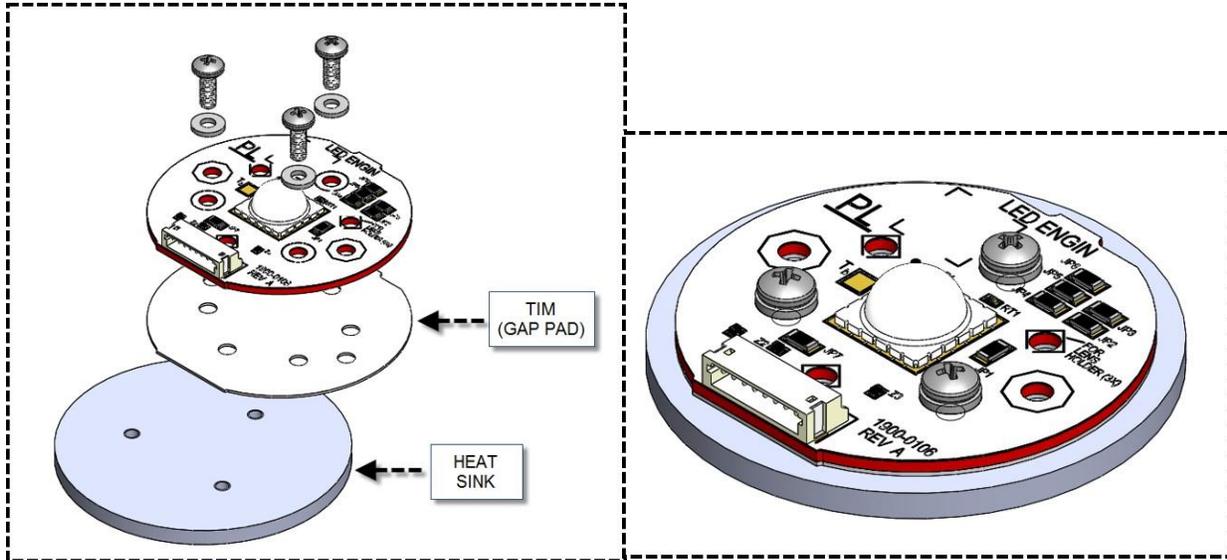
Reference assembly drawing of LCP and typical "round" MCPCB
